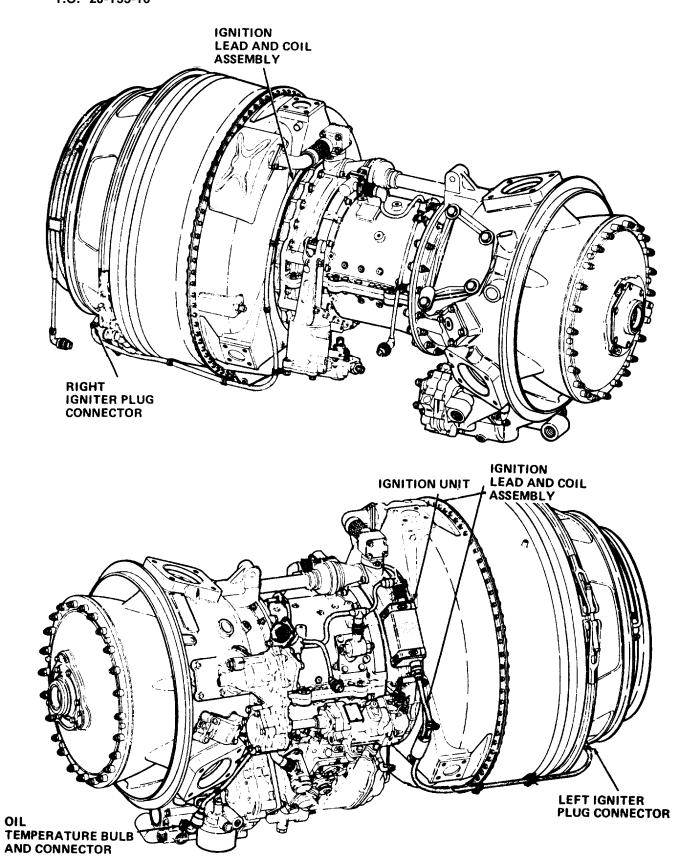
Electrical System External Components (T53-L-11 Series Engines)
